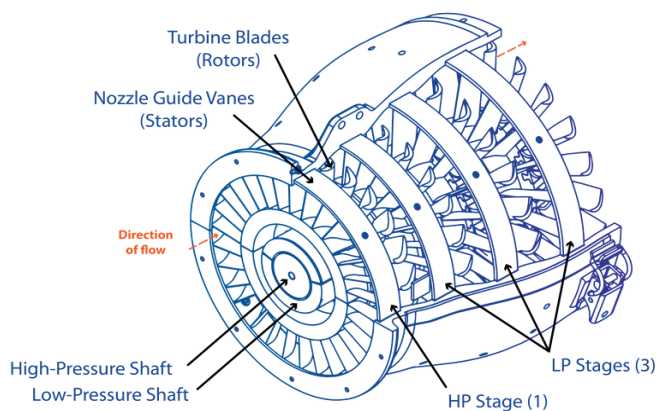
Diagram showing the placement and shape of turbine blades within the turbine section of a jet engine.
